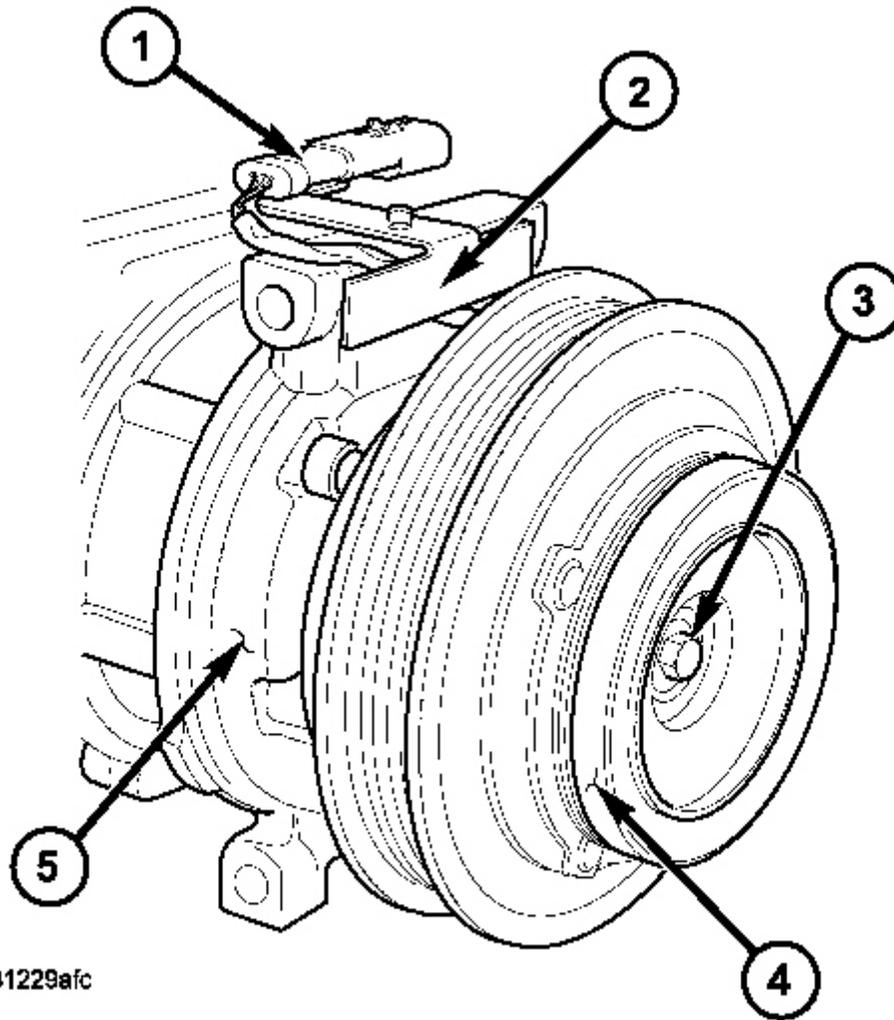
Compressor Clutch Field Coil Connector, Connector Bracket, Compressor Shaft Bolt, Clutch Plate & A/C Compressor
